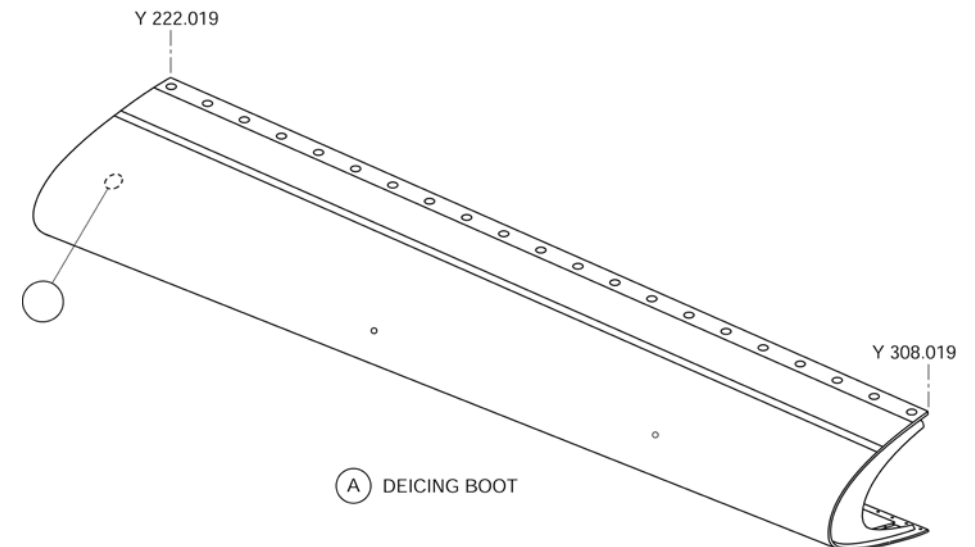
Outboard Wing - De-Ice Boots and Hoses
